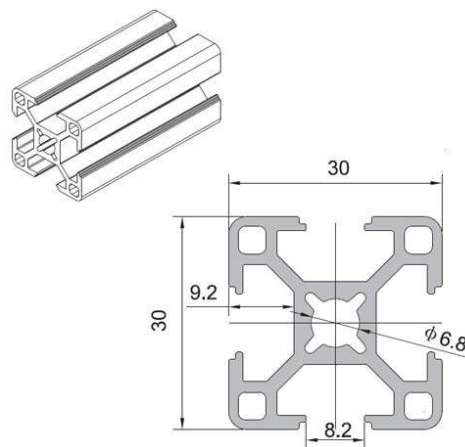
3030 Aluminum extrusion with dimensions in mm
